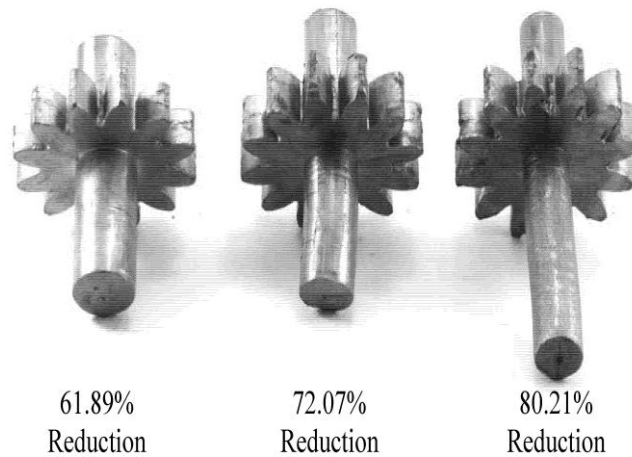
Extruded forward-backward extrusion-forging 12-tooth gear head shaped product
